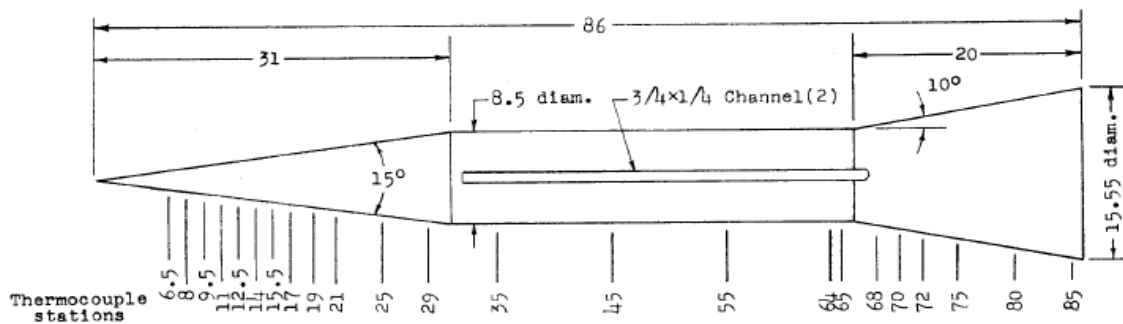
Model dimensions and thermocouple stations (dimensions in inches).
